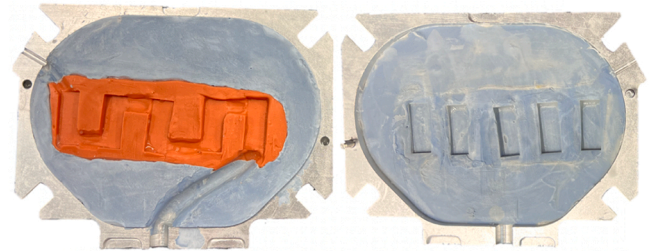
Injection technique; Martens hardness specimen geometry embedded in a flask.
